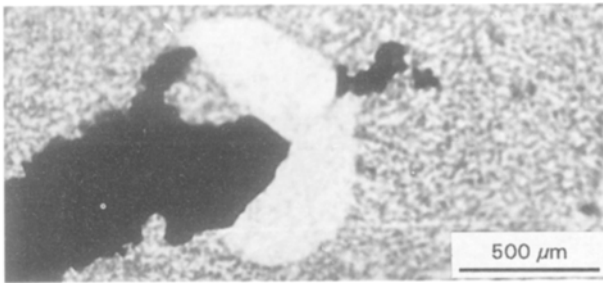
Optical fractograph showing the fracture path in the mid-plane section of 0.024 mass % Sr-modified eutectic Al-Si alloy (steel-mould cast).
